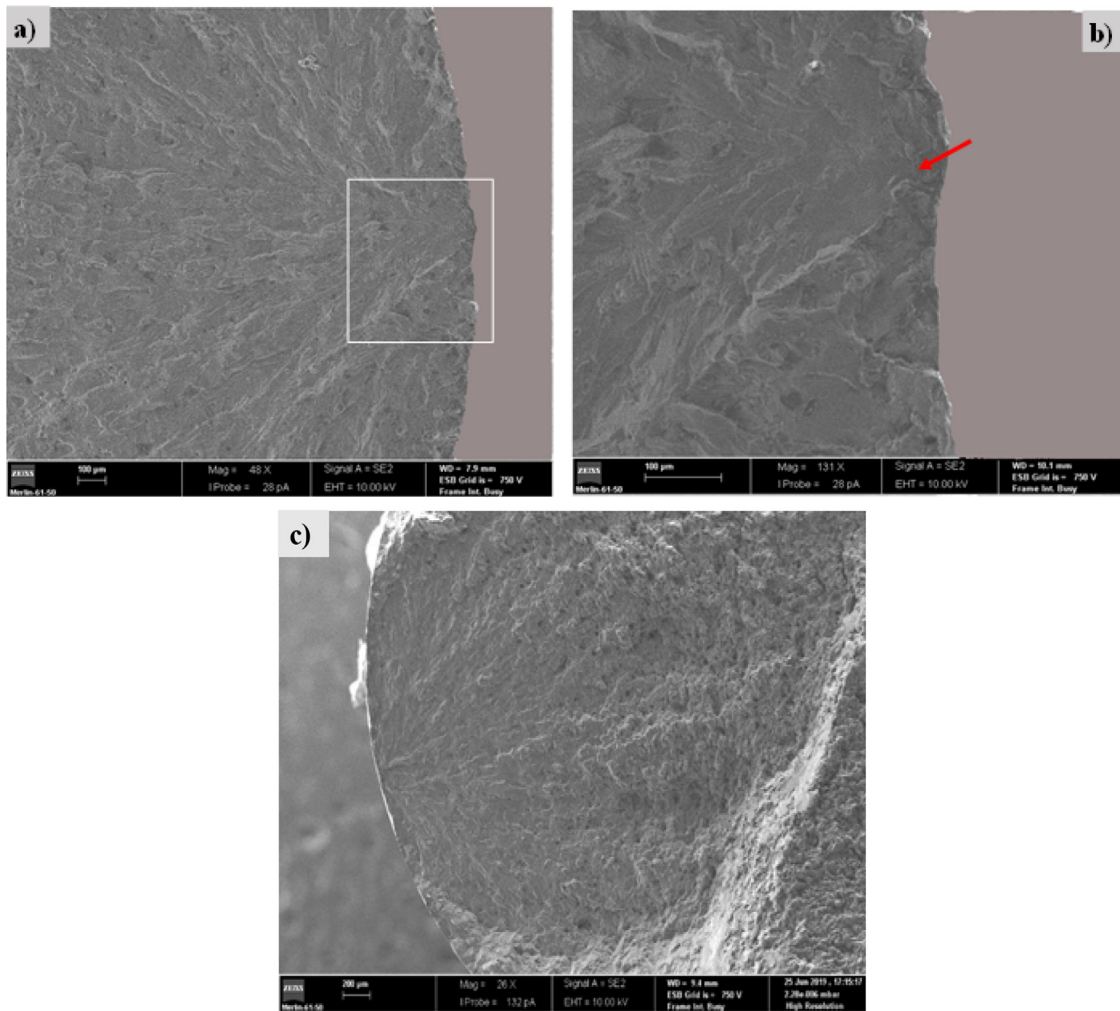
Macro images of fracture surfaces in treated series: (a) crack initiation in S110\_11 specimen (b) internal crack initiation in GB8\_11 specimen and (c) a lateral image of the conical crack growth surface of GB8\_11 specimen.
